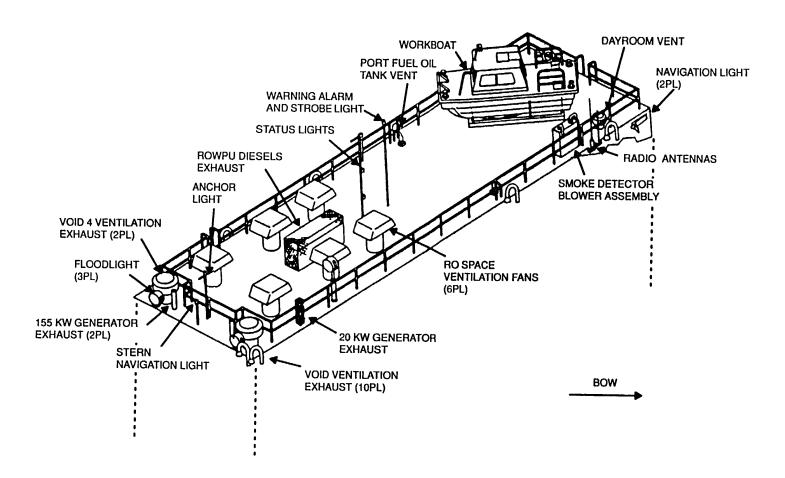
Major Components of ROWPU Barge Systems and Equipment - Deckhouse Roof (Sheet 1 of 3)
